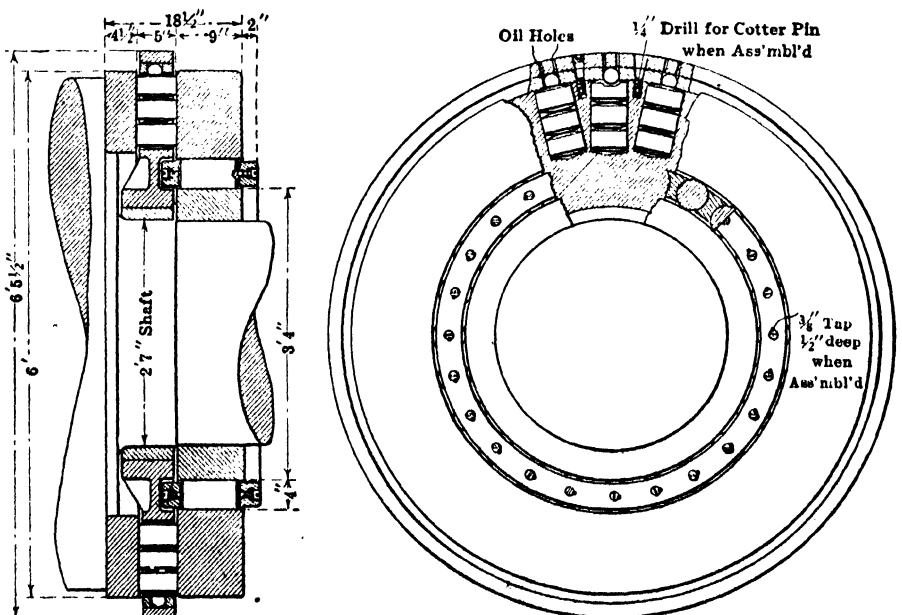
Roller thrust bearing carrying a load of 2,225,000 lbs. at 100 r.p.m.
